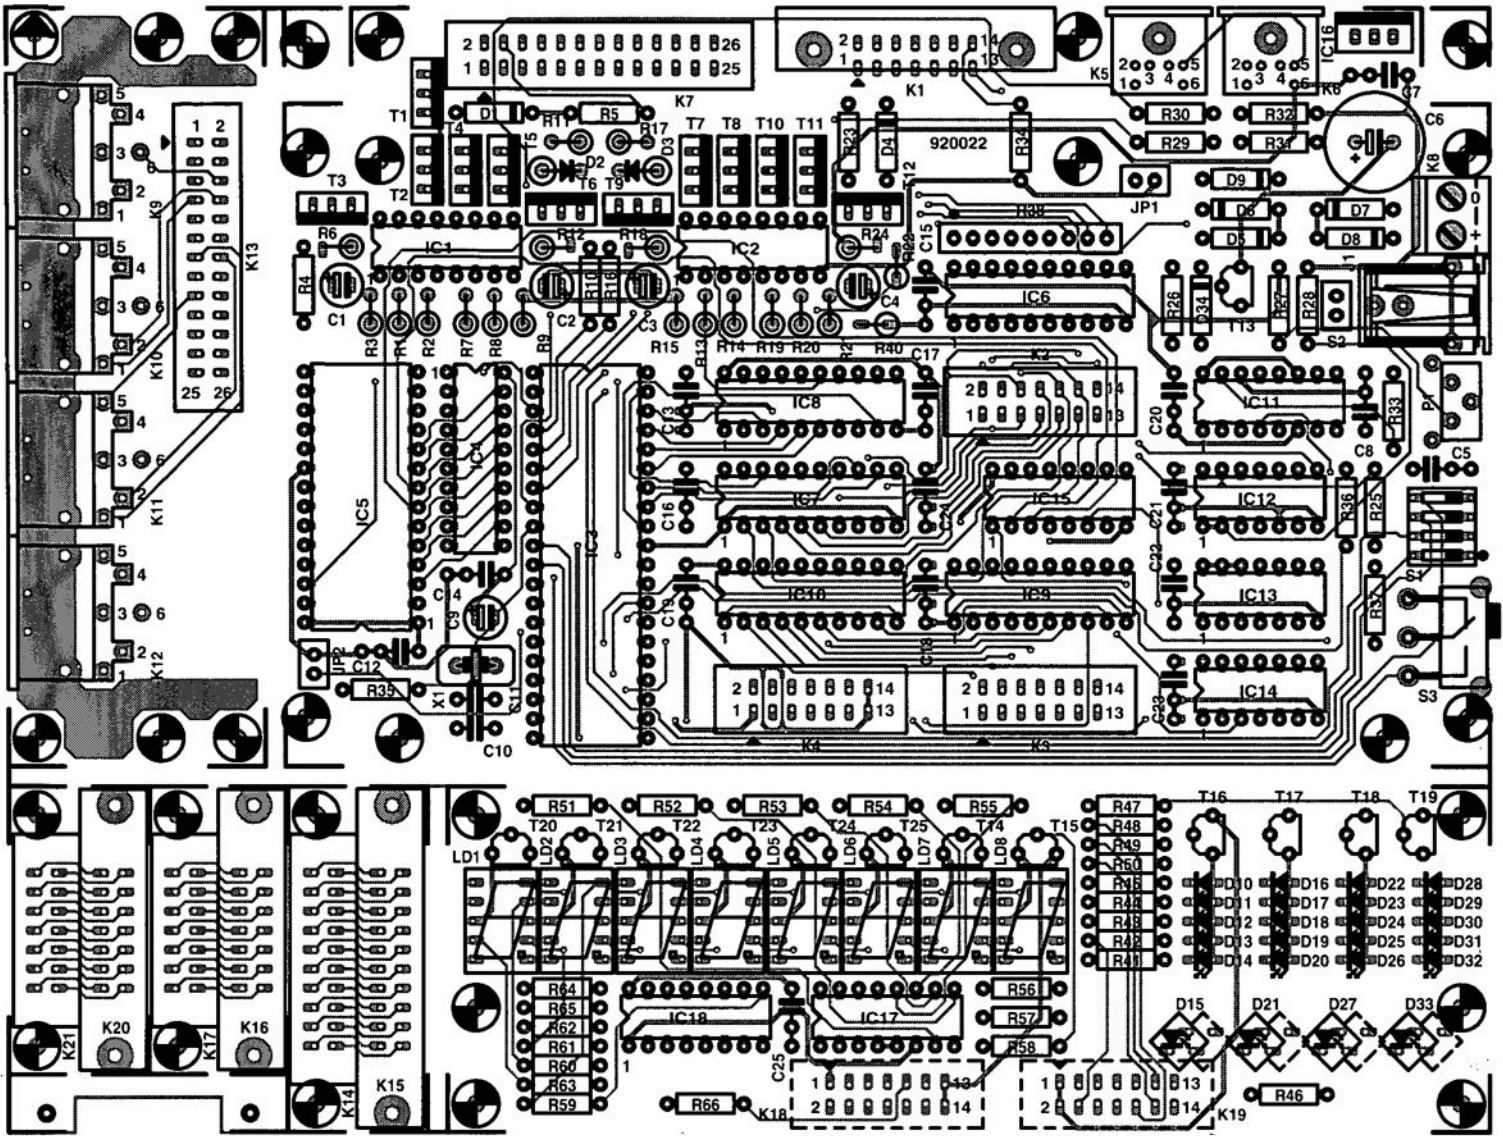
Component overlay (size: 100%) of the dissolve unit PCB.
